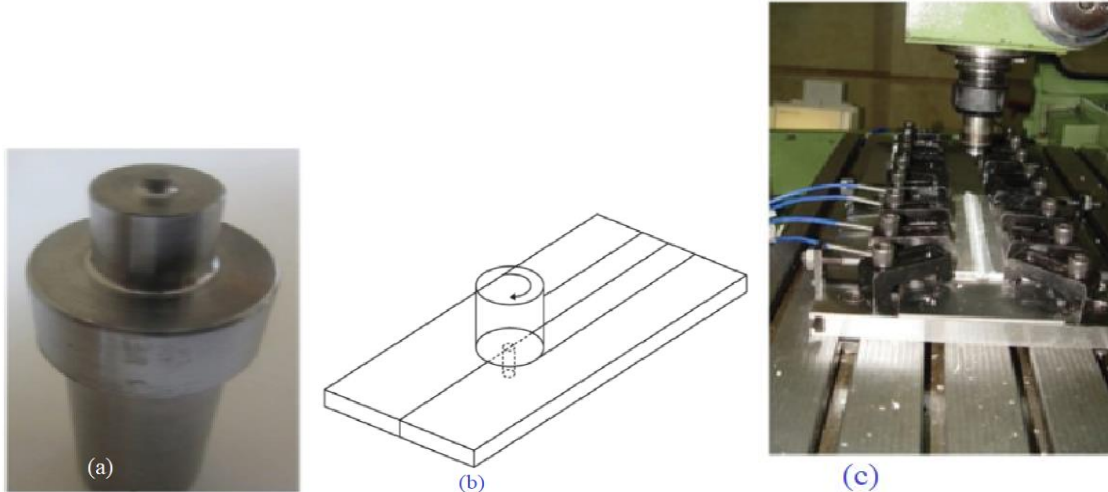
2 Friction stir welding (a) tool, (b) schematic of FSW process and (c) set- up of FSW showing; *Asadi et al. (2014)*.
